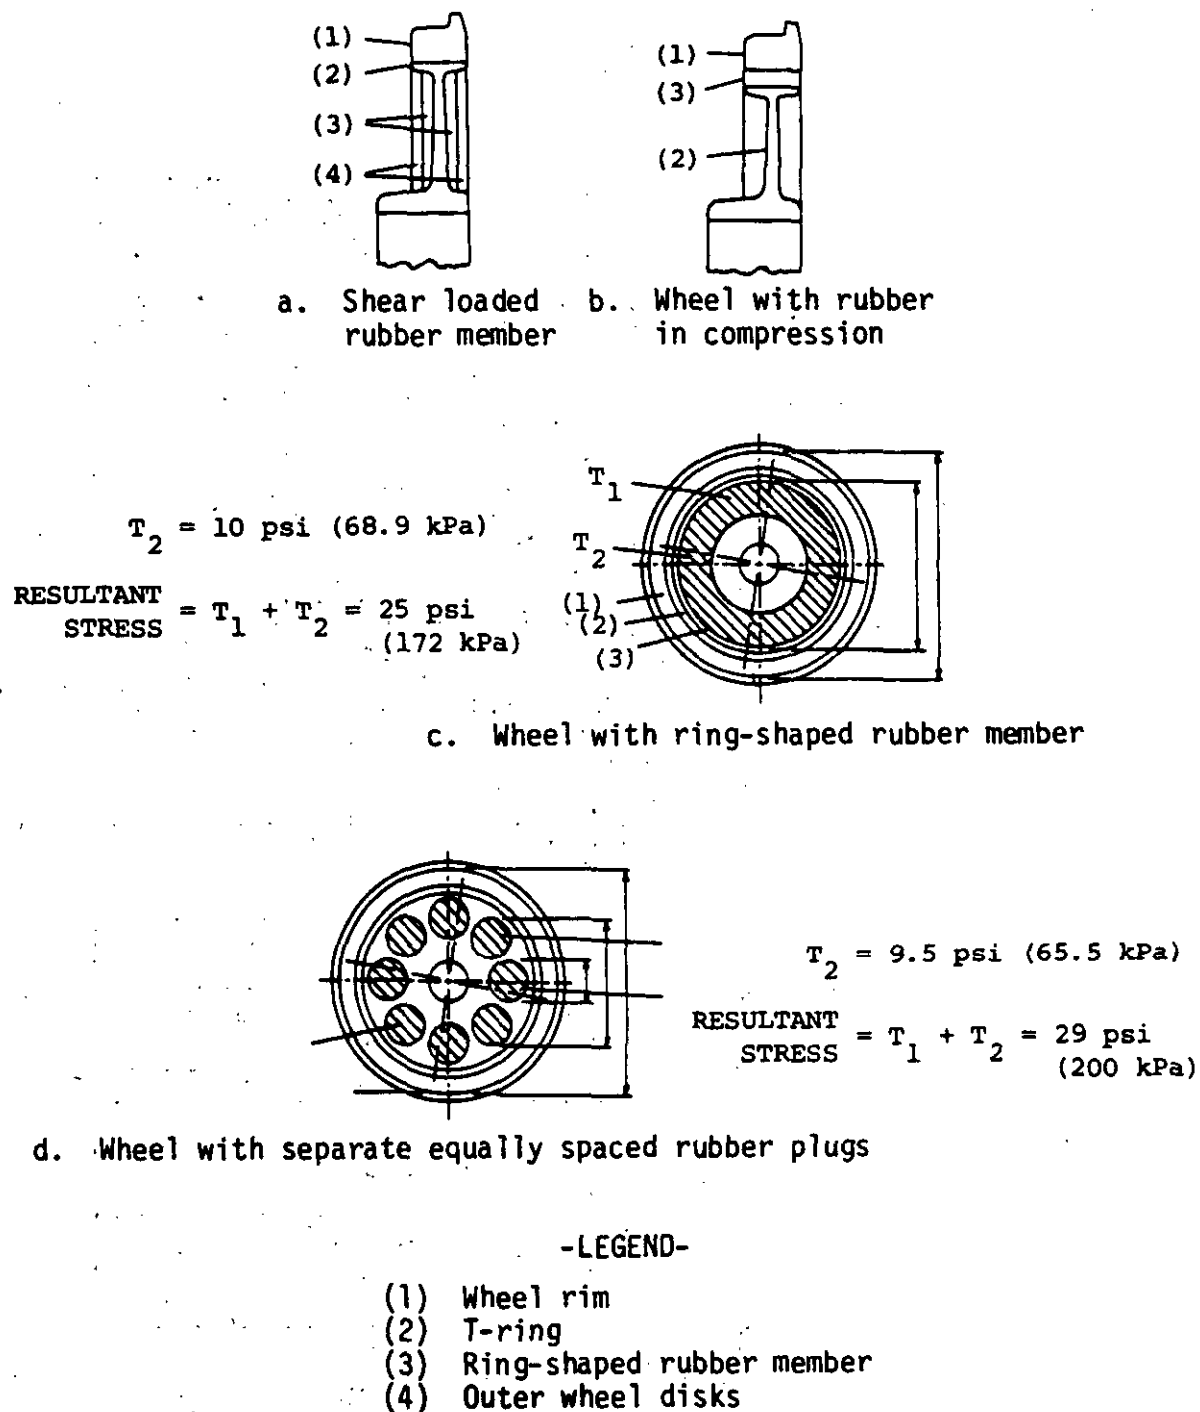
VEHICLE WHEELS WITH BUILT-IN SHOCK MOUNTS (46)
